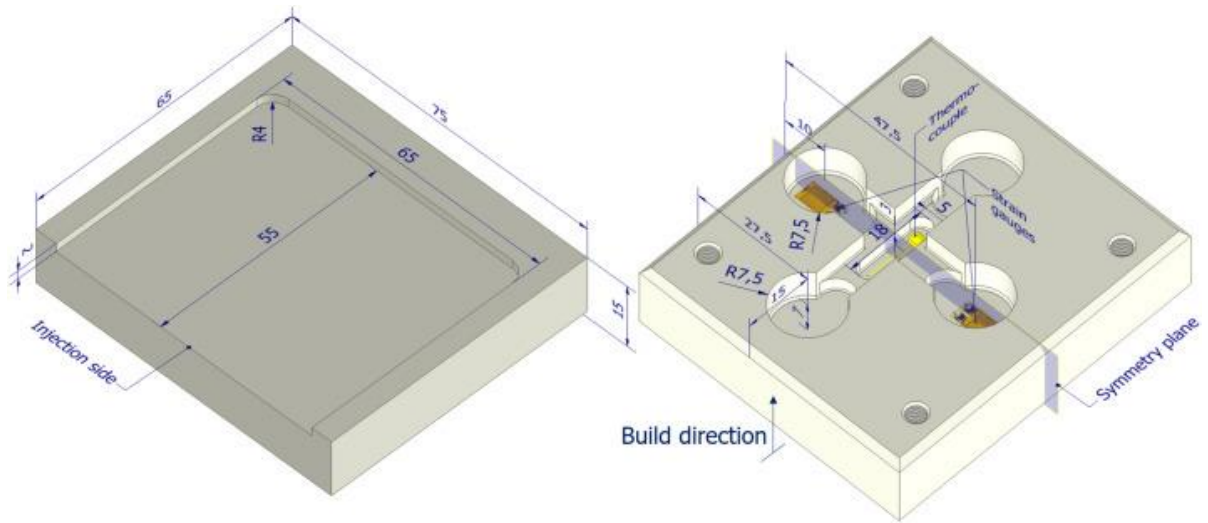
The moving side mould insert with the strain gauges and the thermocouple.
